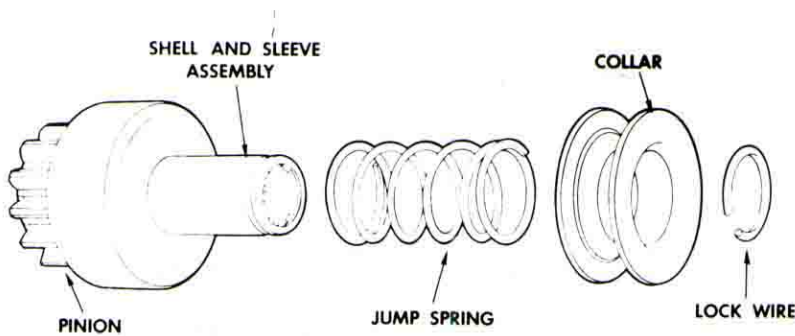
Disassembled view of late type intermediate duty sprag clutch drive assembly.
